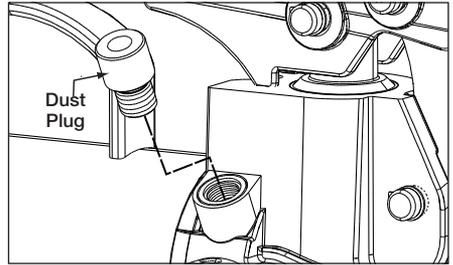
, Relief Valve (P-77, P-80, P-801 and P-84)
